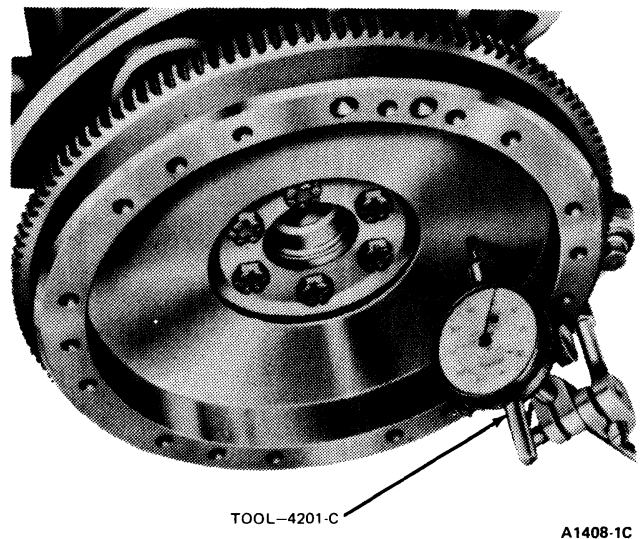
Checking Flywheel Face Runout—Manual Transmission
